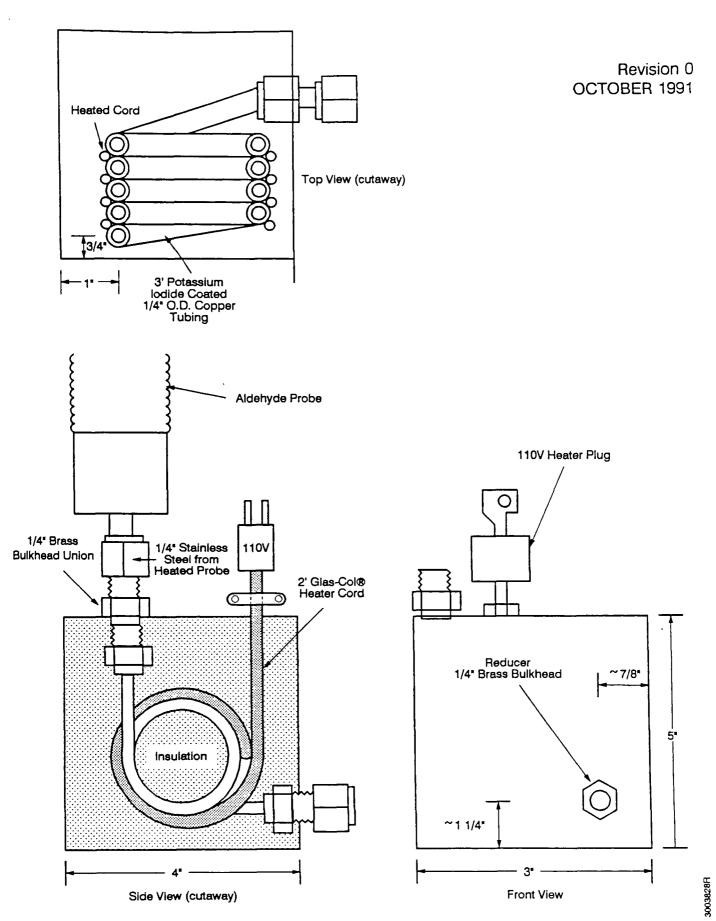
Crossectional view of the O_3 scrubber assembly.
